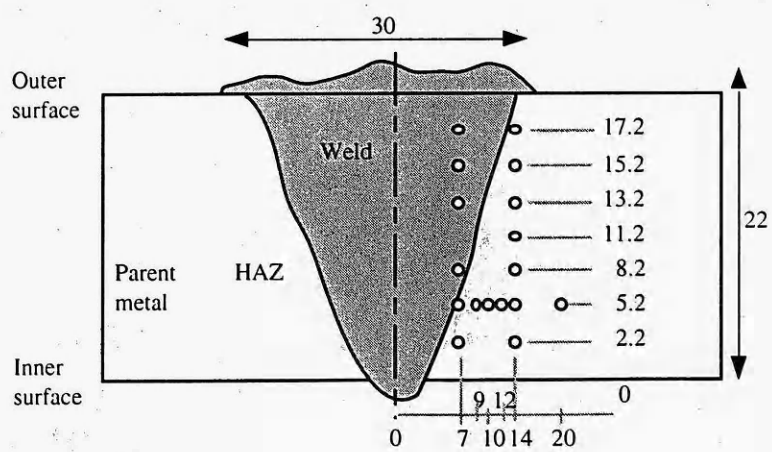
Measurement positions in the large pipe with respect to the weld centre-line and inner surface. All dimensions are in millimetres.
